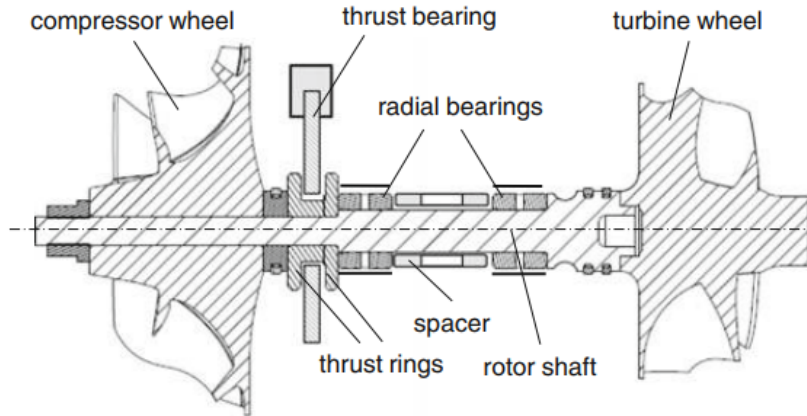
Rotor and bearing system in a turbocharger, adopted from [1]
